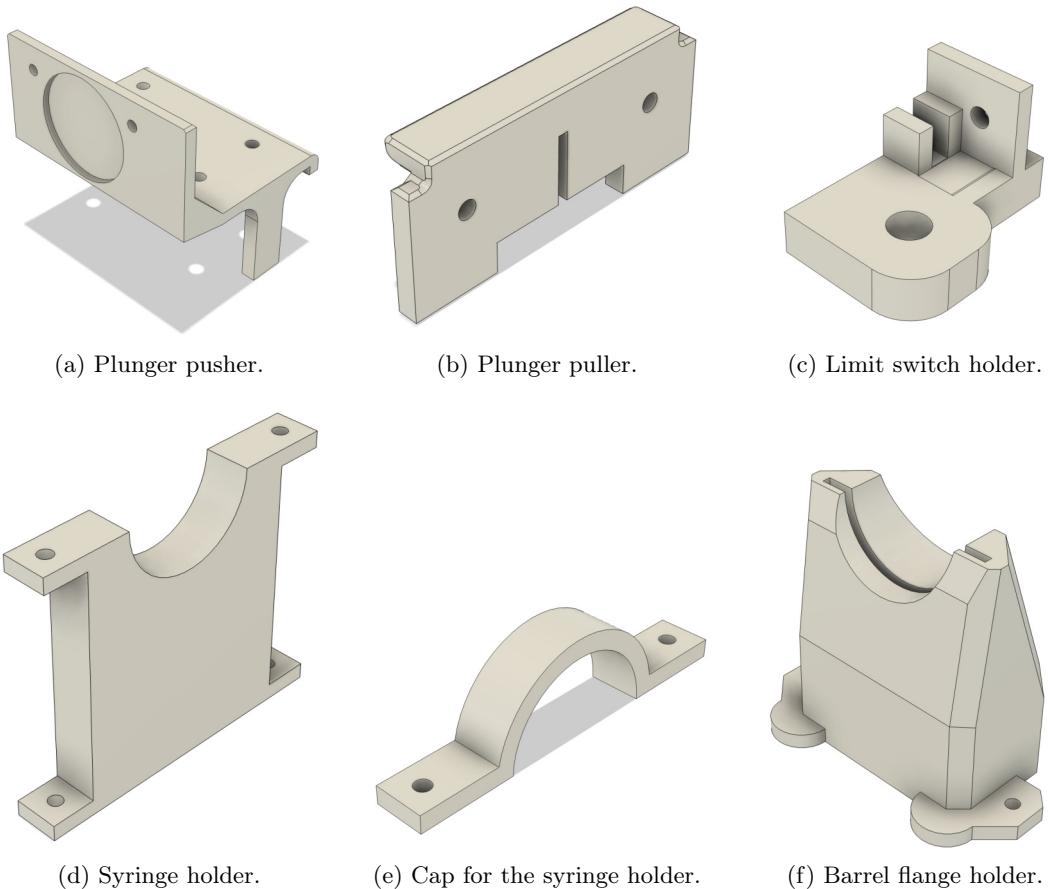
3D printed parts modeled in Fusion360 and printed with PLA, 20% infill.
